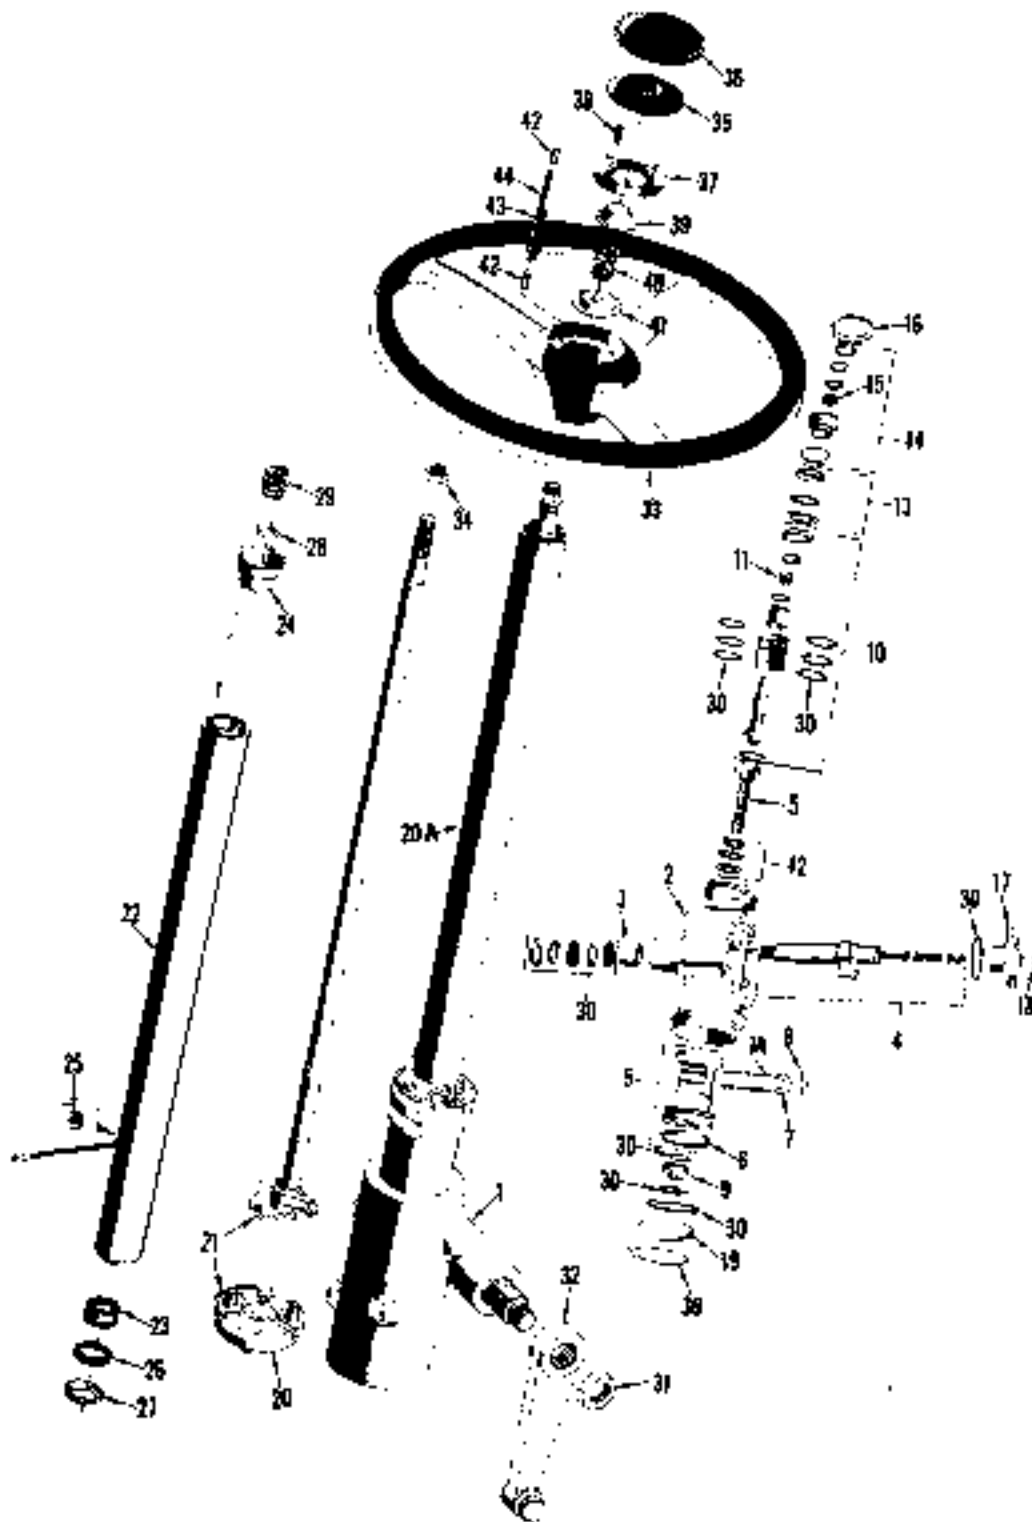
STEERING GEAR, MA30 w/POWER STEERING AND MA40 AND 50
